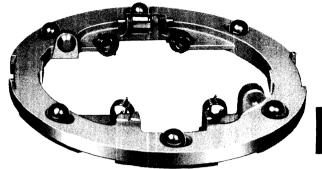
Removal or Installation of Pressure Plate Retaining Springs (Front or Rear Disc Brake)
